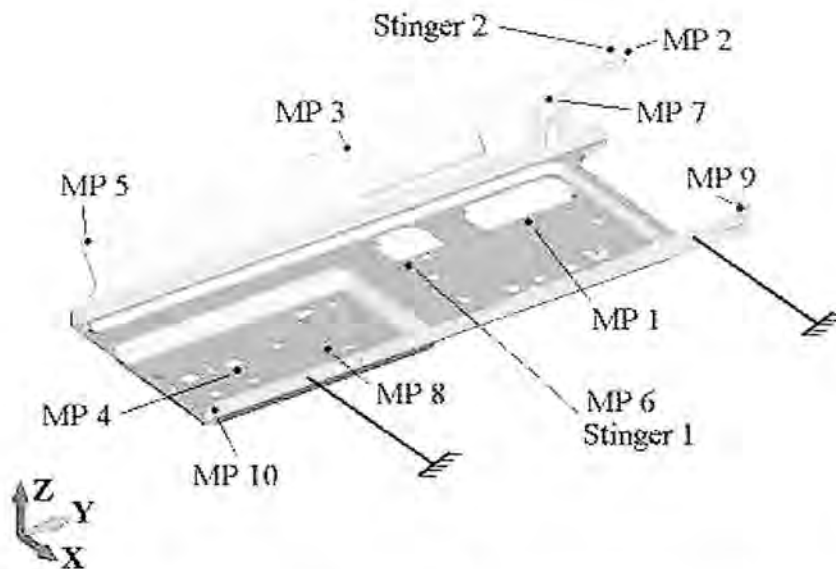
Accelerometer, stinger and suspension positions pointed out on the Electric bridge.
